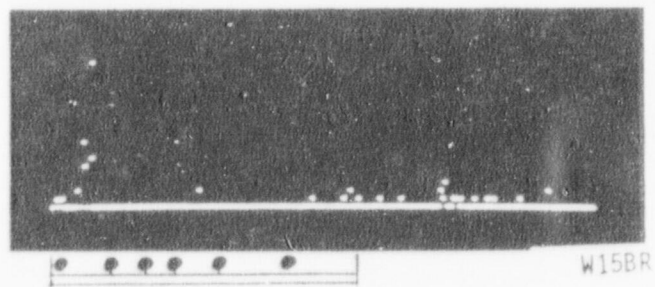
DETECTION OF INCOMPLETE PENETRATION DURING SUBMERGED ARC WELDING OF A533B PRESSURE VESSEL STEEL
